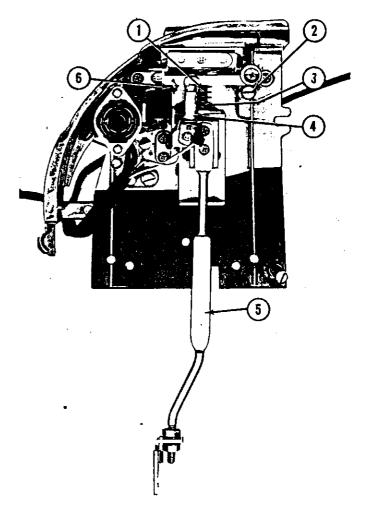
22. CHEEK CASTING ASSEMBLY, R.H.	68628
